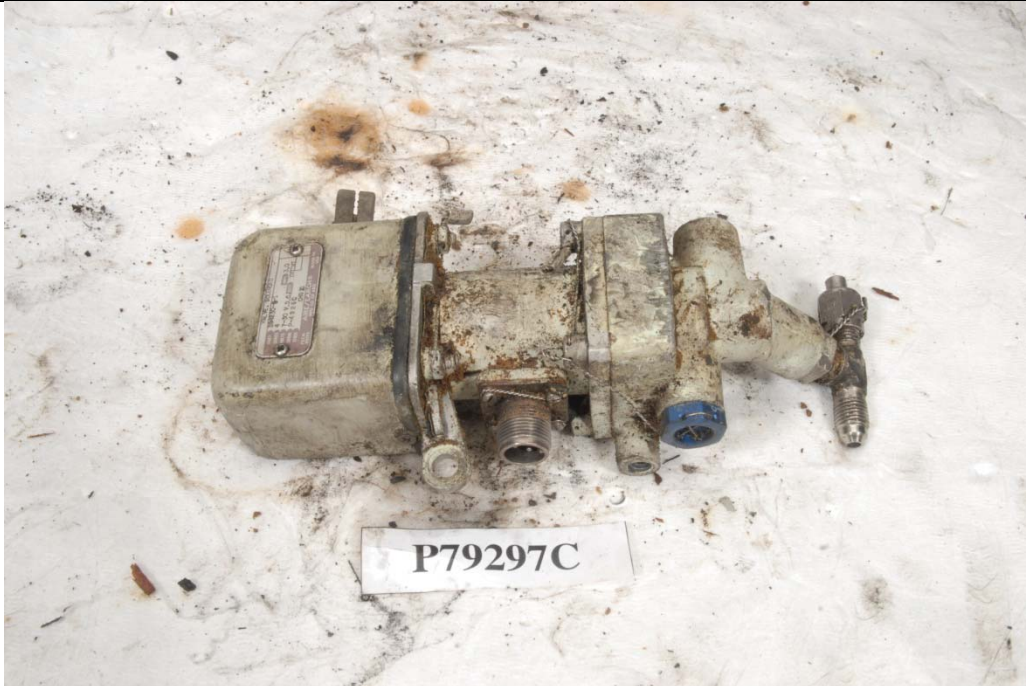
P-79297C, Turbine Air/Oil Carbon Seal
